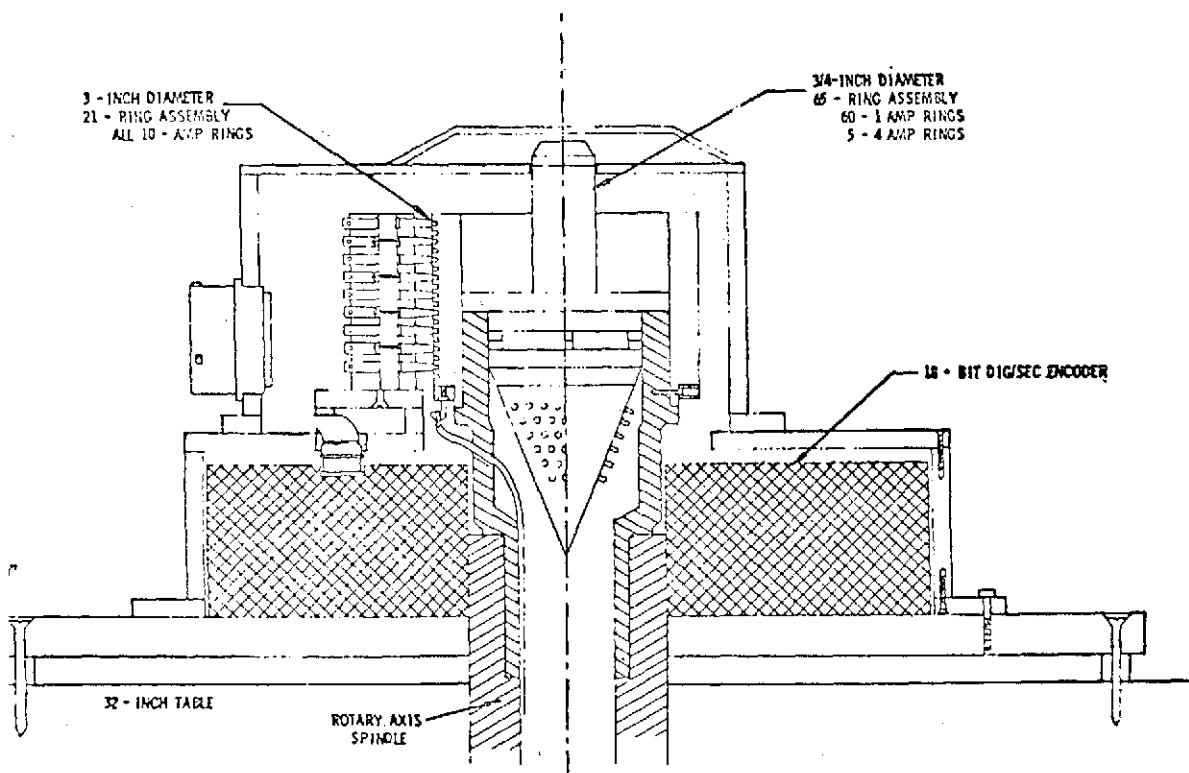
Test Table Slip Ring & Encoder Assembly
